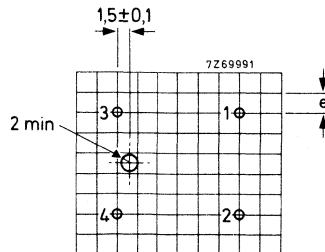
Hole pattern for mounting on a printed-wiring board (component side). Hole diameter  $1,3 \pm 0,1$  mm.  $e = 2,54$  mm (0,1 in).
